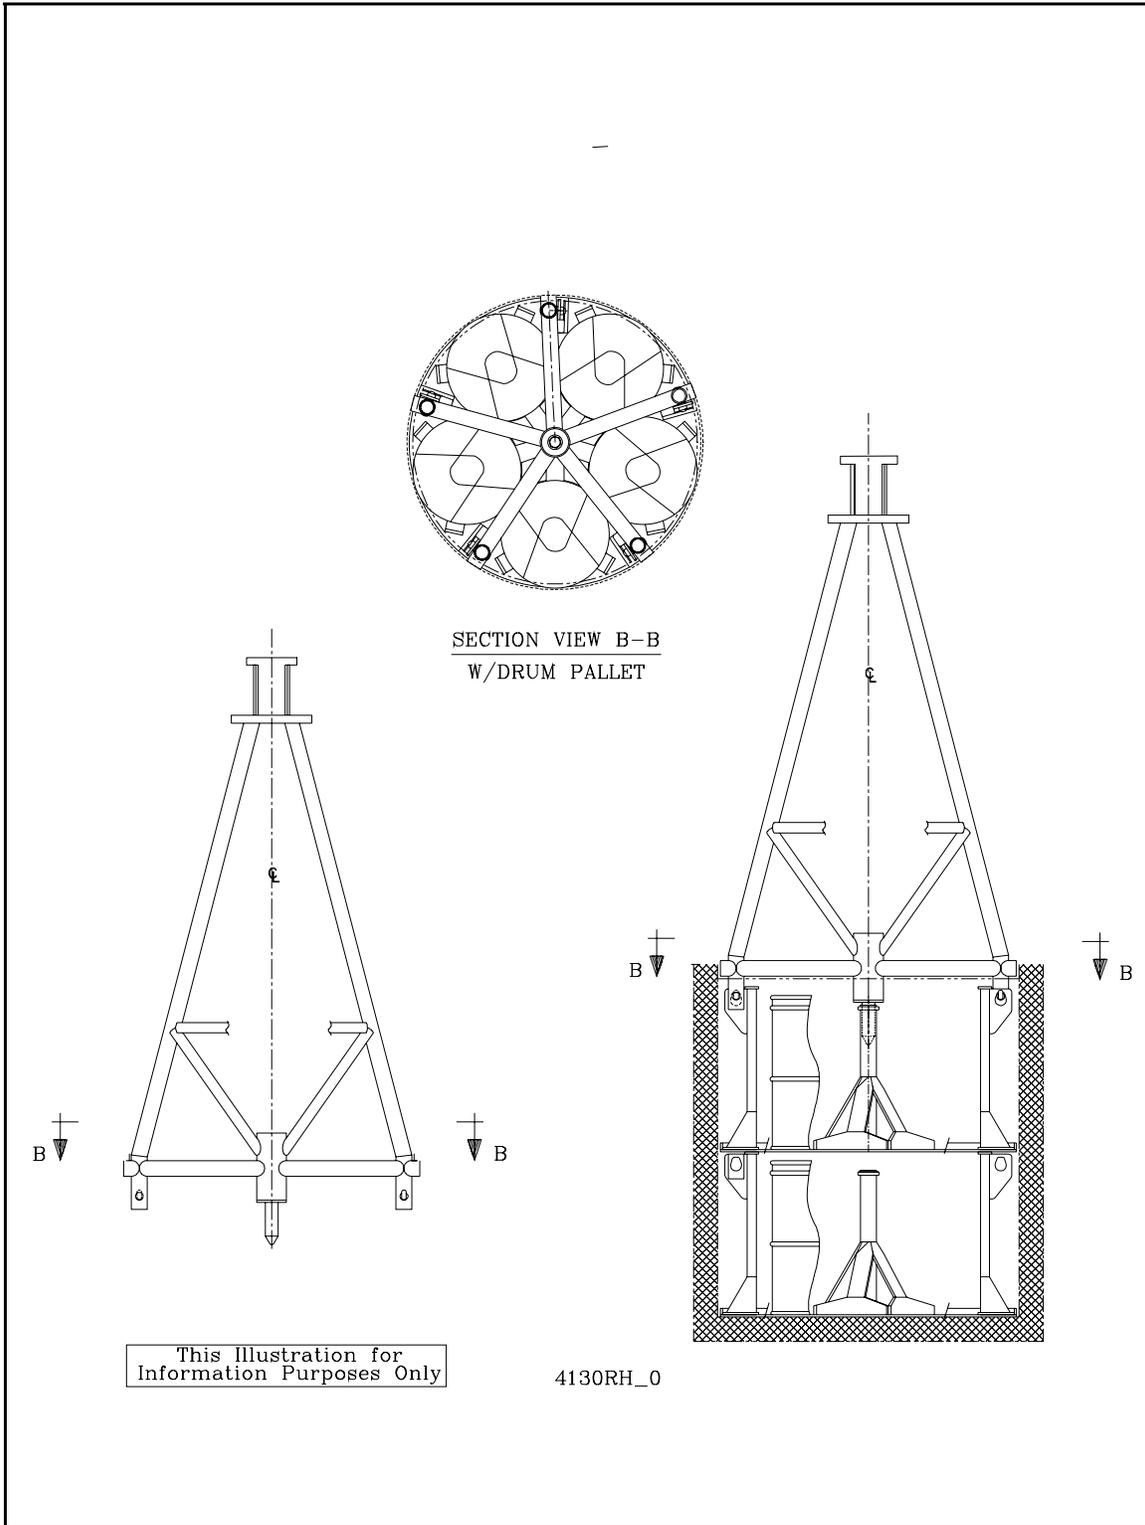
, 10-160B Drum Carriage Lift Fixture
